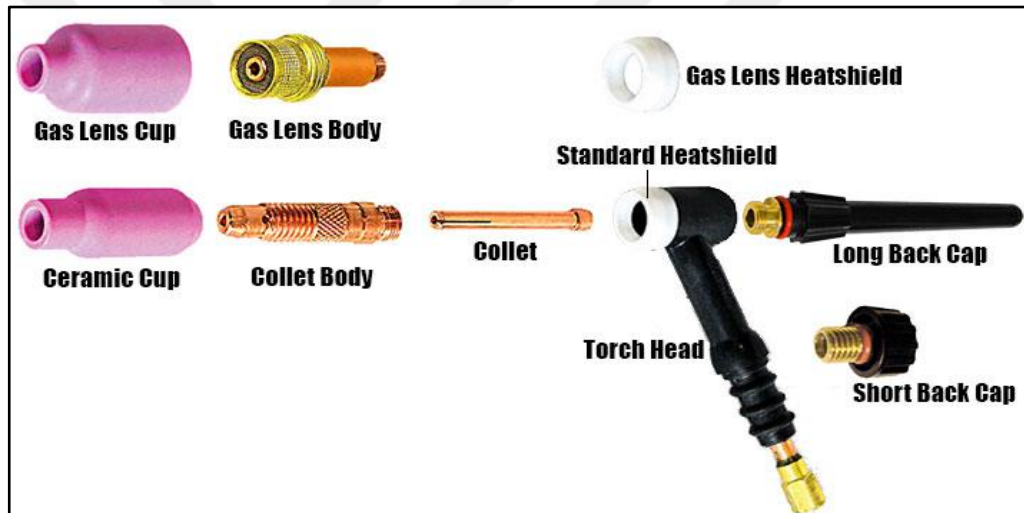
The Basic pieces of welding TIG Torch.
